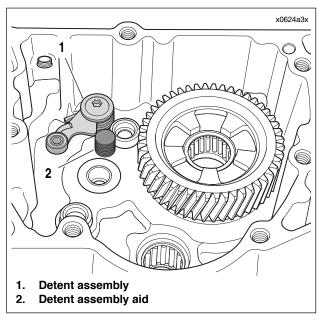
Using Gear Detent Assembly Aid (Part No. B-45520)
